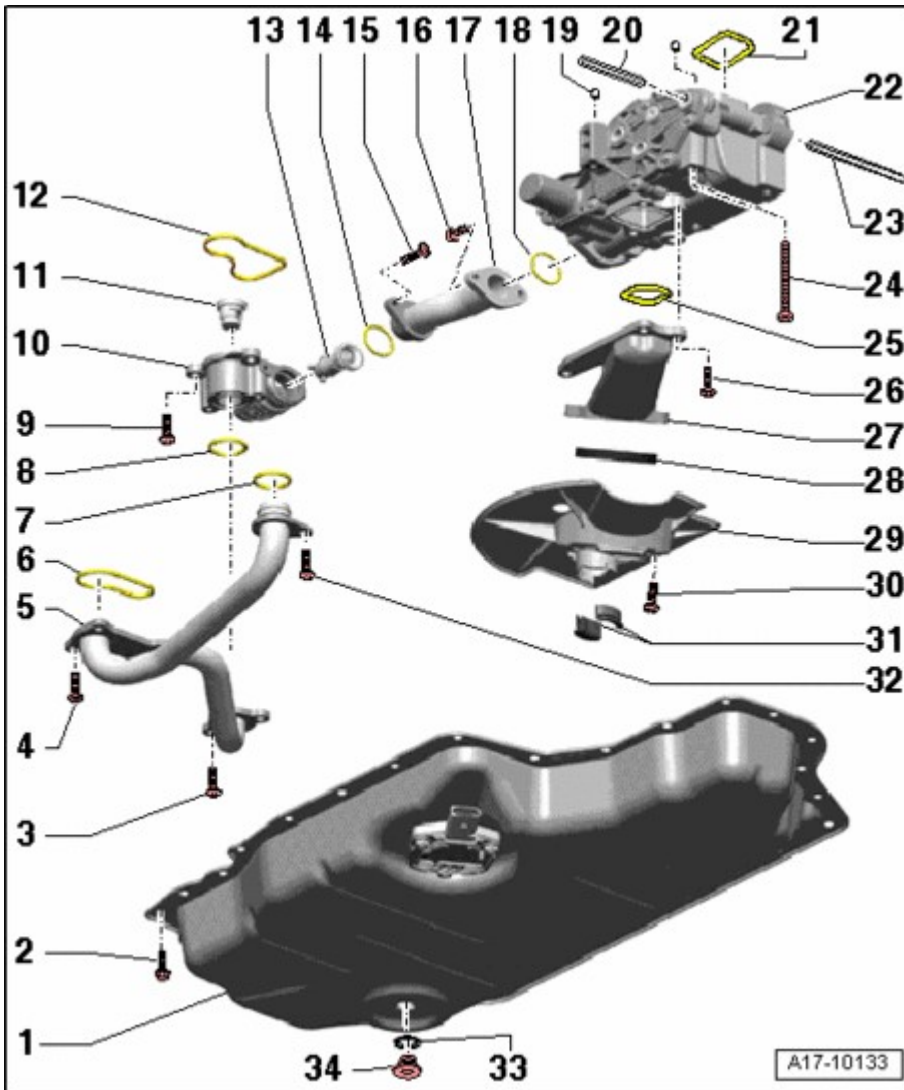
Oil Pump, Oil Pan Lower Section, Component Overview
